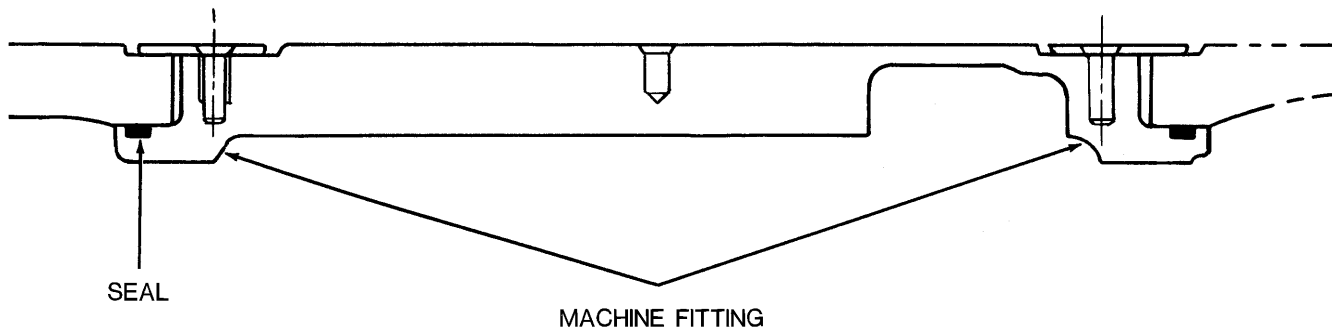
Machine Fitted Plug-Type Access Door for Attaching Screws
